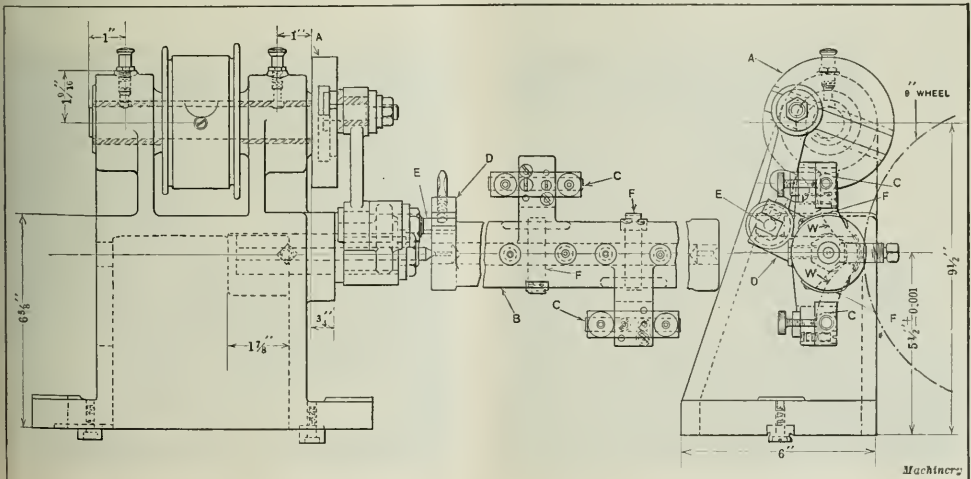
Assembled View of the Special Head and Grinding Fixture employed on the Machine shown in Fig. 1
